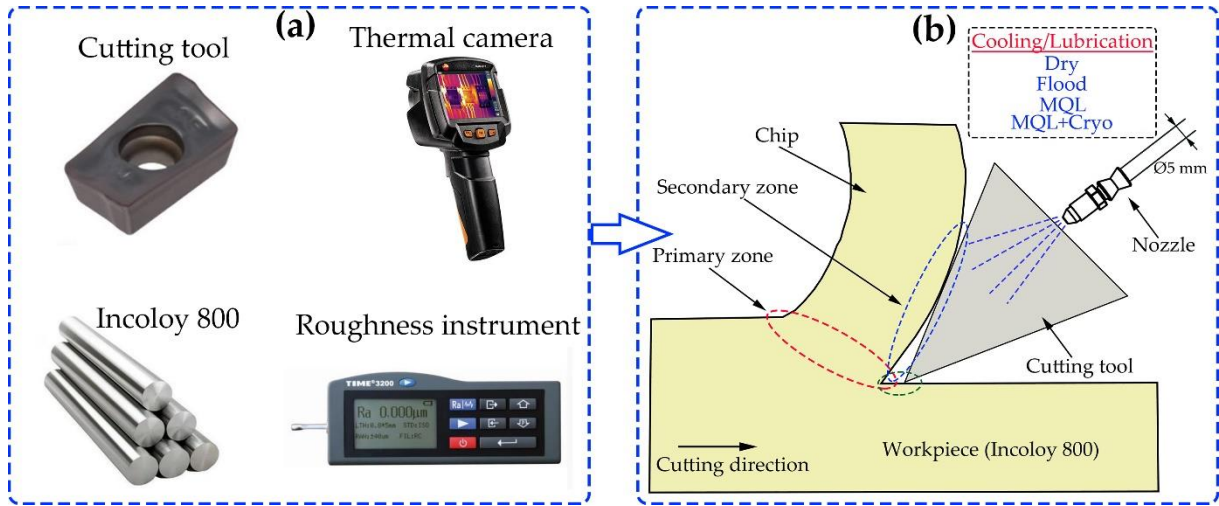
Experiment scheme showing (a) material and equipment used in the milling tests (b) an illustration of the milling test setup
